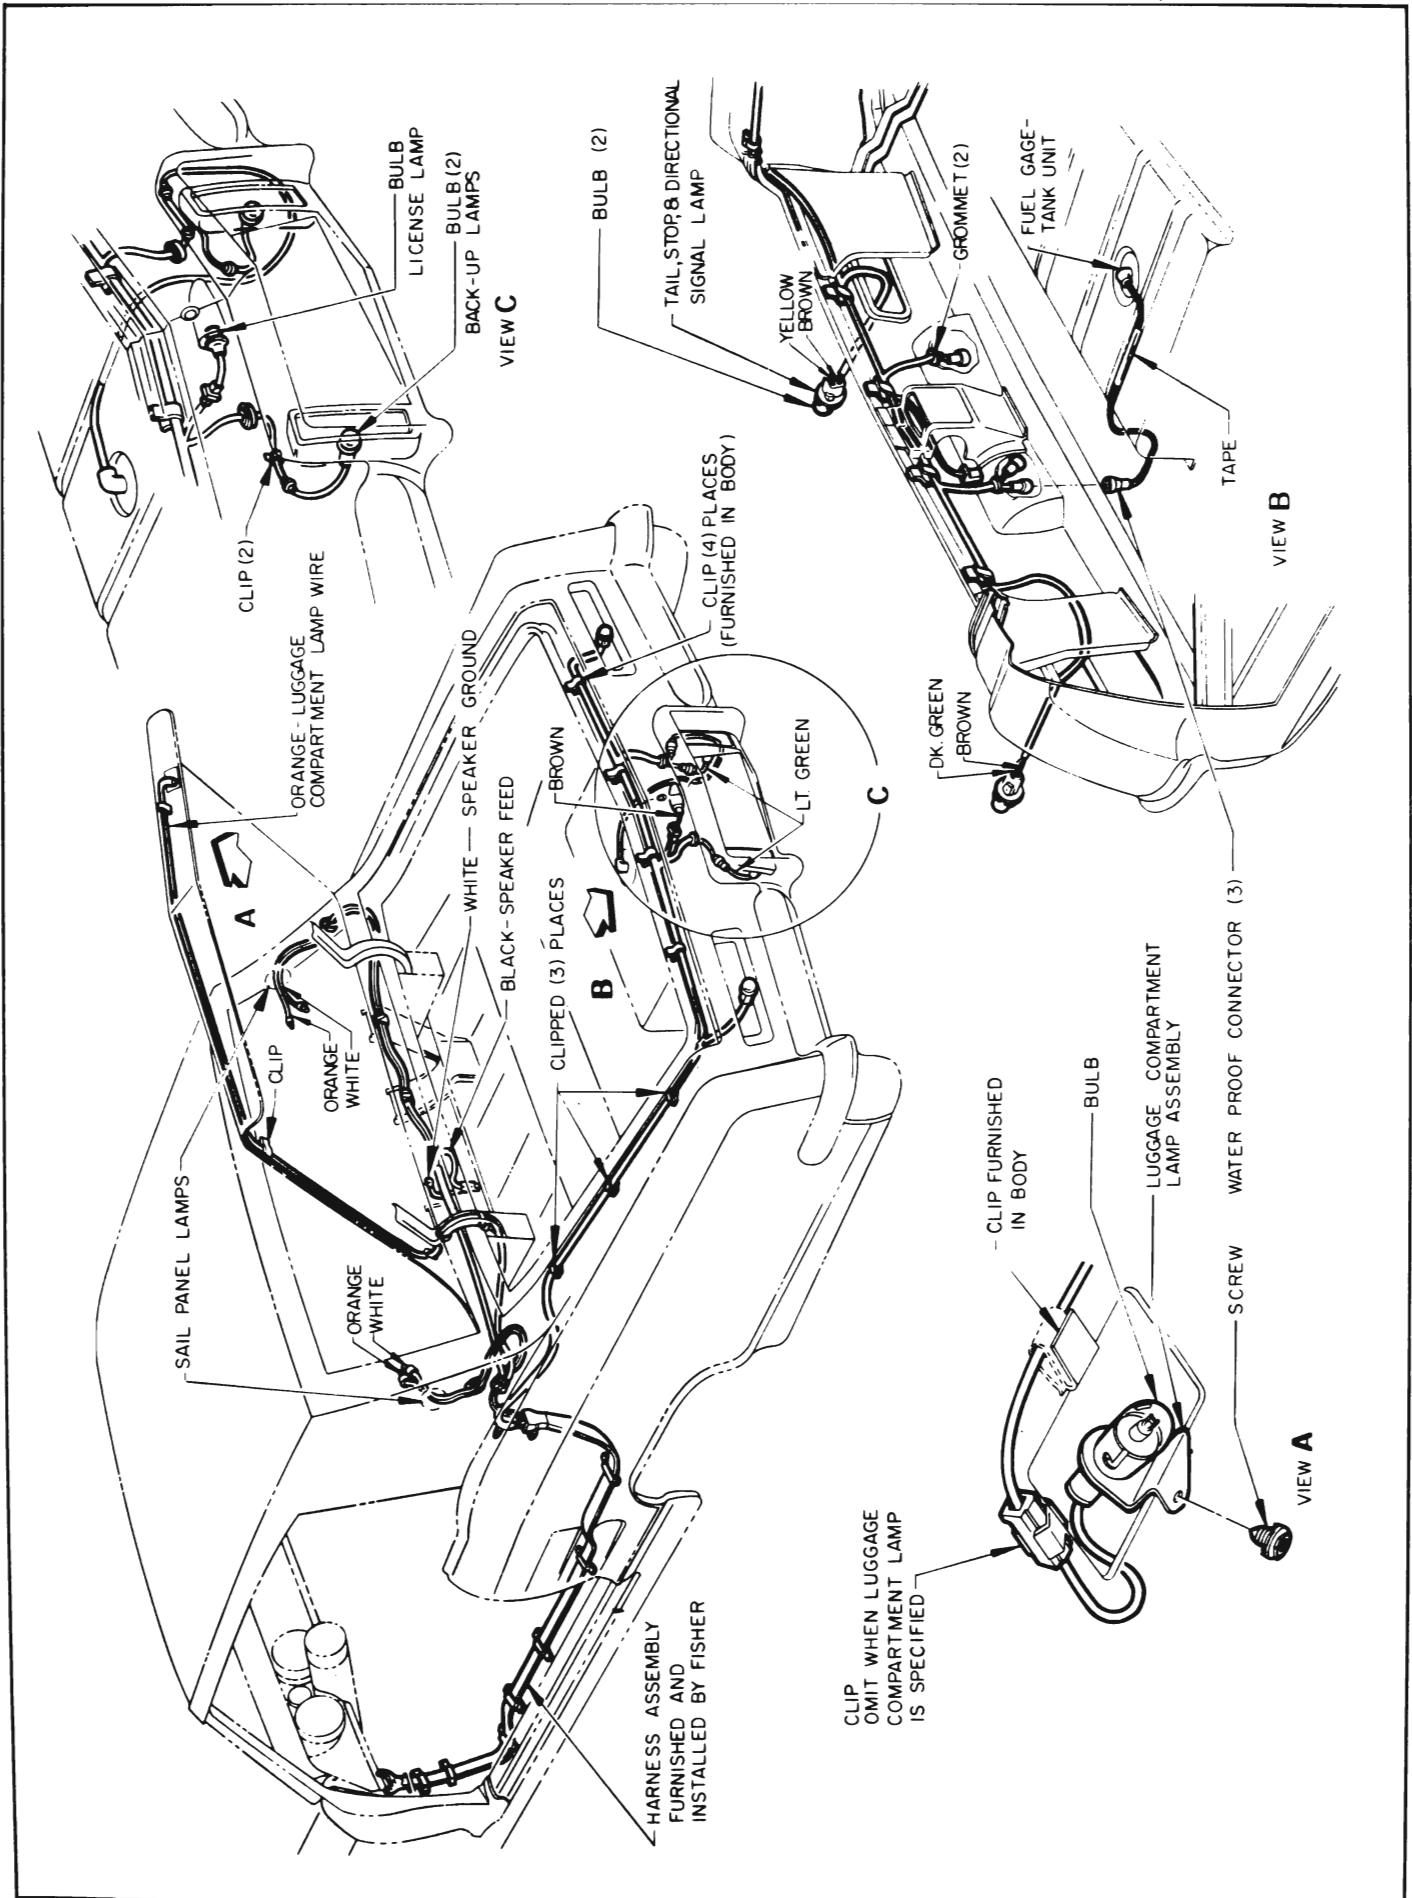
Rear Lamp and Fuel Gauge Wiring—Riviera
